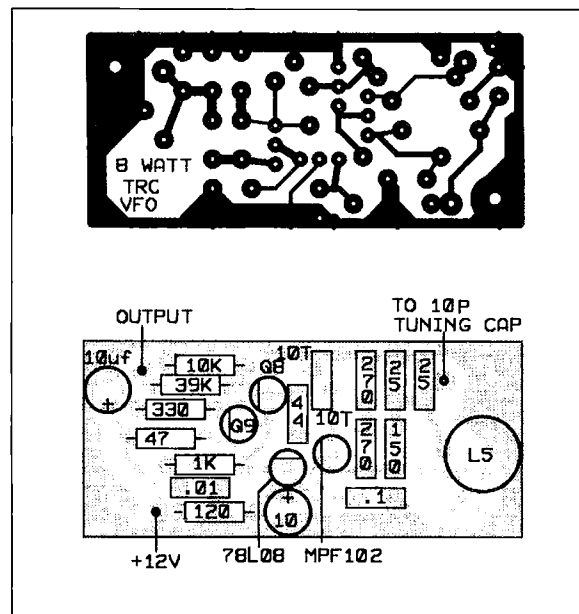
a. PC board foil pattern for the VFO board. b. Parts placement.
